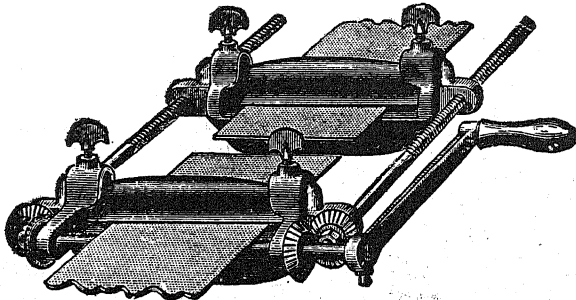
,247.—Belt clamp for stretching belt and holding the ends while making joint. It consists of a *stretching frame*, the two ends of which are coupled by screwed bars; used for pulling the ends of a belt together with the proper tension, when lacing or joining the ends.
